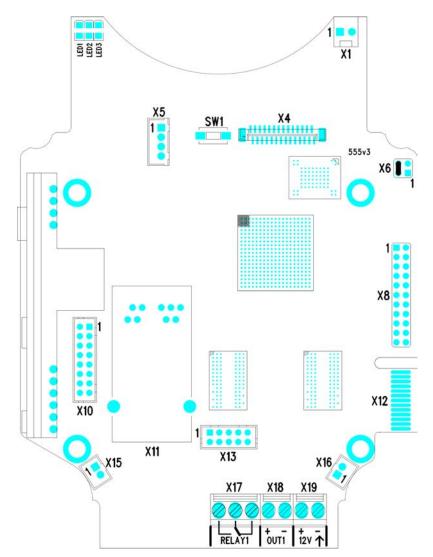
N® Helios IP Force Connectors, PCB Version 555v3
